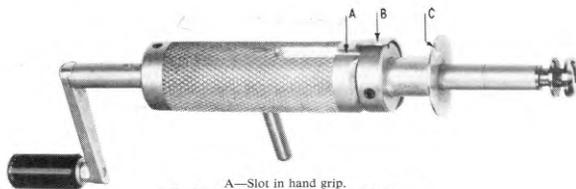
MAIN PARTS OF WRAPPING TOOL
